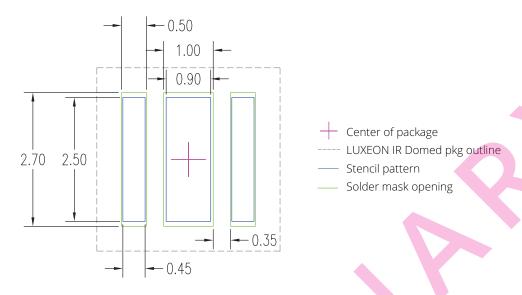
Recommended PCB solder pad layout for LUXEON IR Domed Line.
